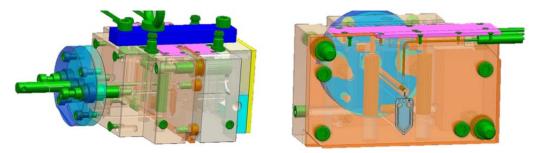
TECOS tests of new mould for paper clip - weld lines
